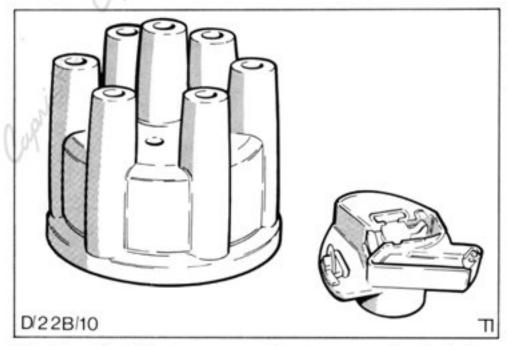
Distributor cap and rotor arm checked for hairline cracks, damage or excessive arcing.
